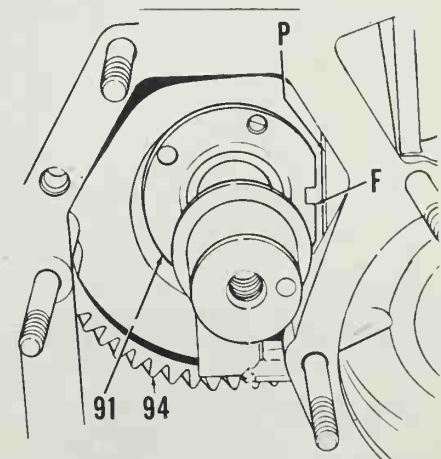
Turn camshaft (91) so flat (F) on flange will pass crankcase projection (P).
